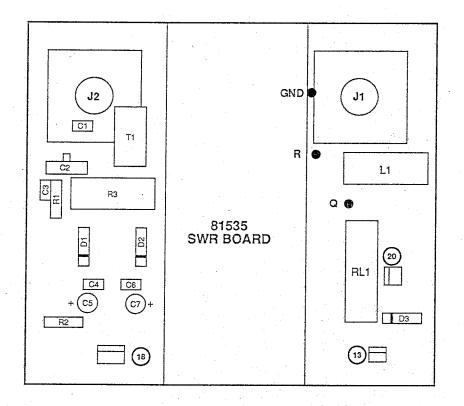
81535 SWR BOARD COMPONENT LAYOUT
